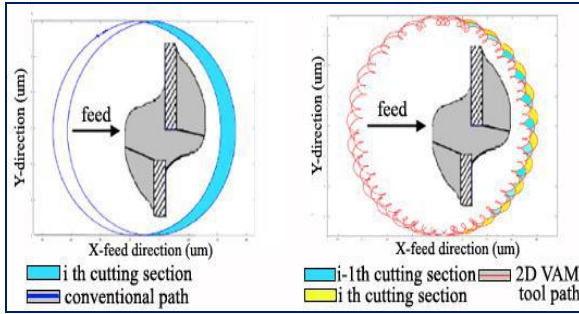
Mode of machining in the conventional and 2-D VAM milling [20]
